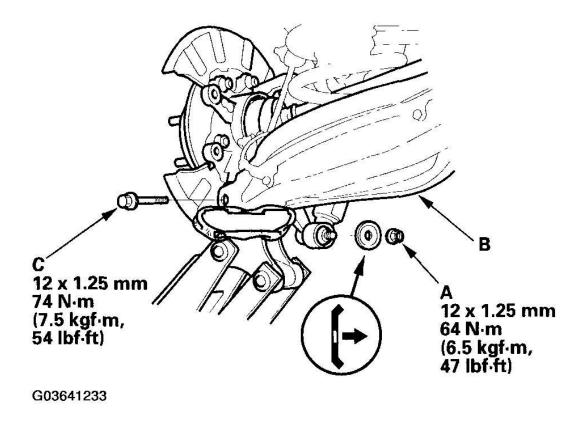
Removing Self-Locking Nut, Washer And Flange Bolt Courtesy of AMERICAN HONDA MOTOR CO., INC.
